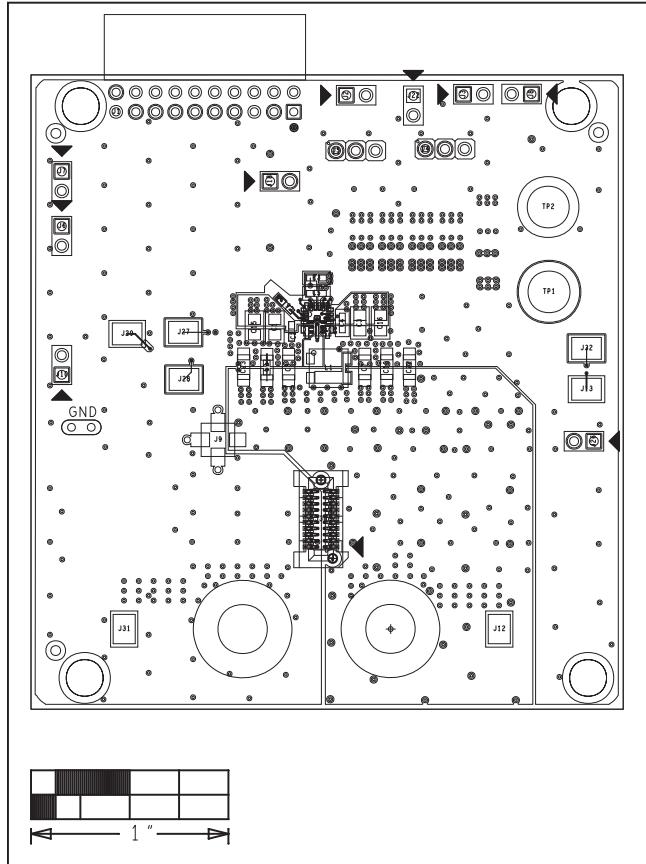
MAX20499C EV Kit PCB Layout—Bottom Silkscreen
